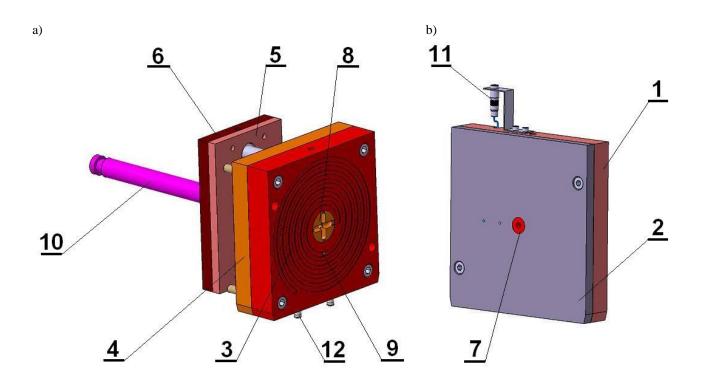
Shaping part of the injection mold a) left side, b) right side
